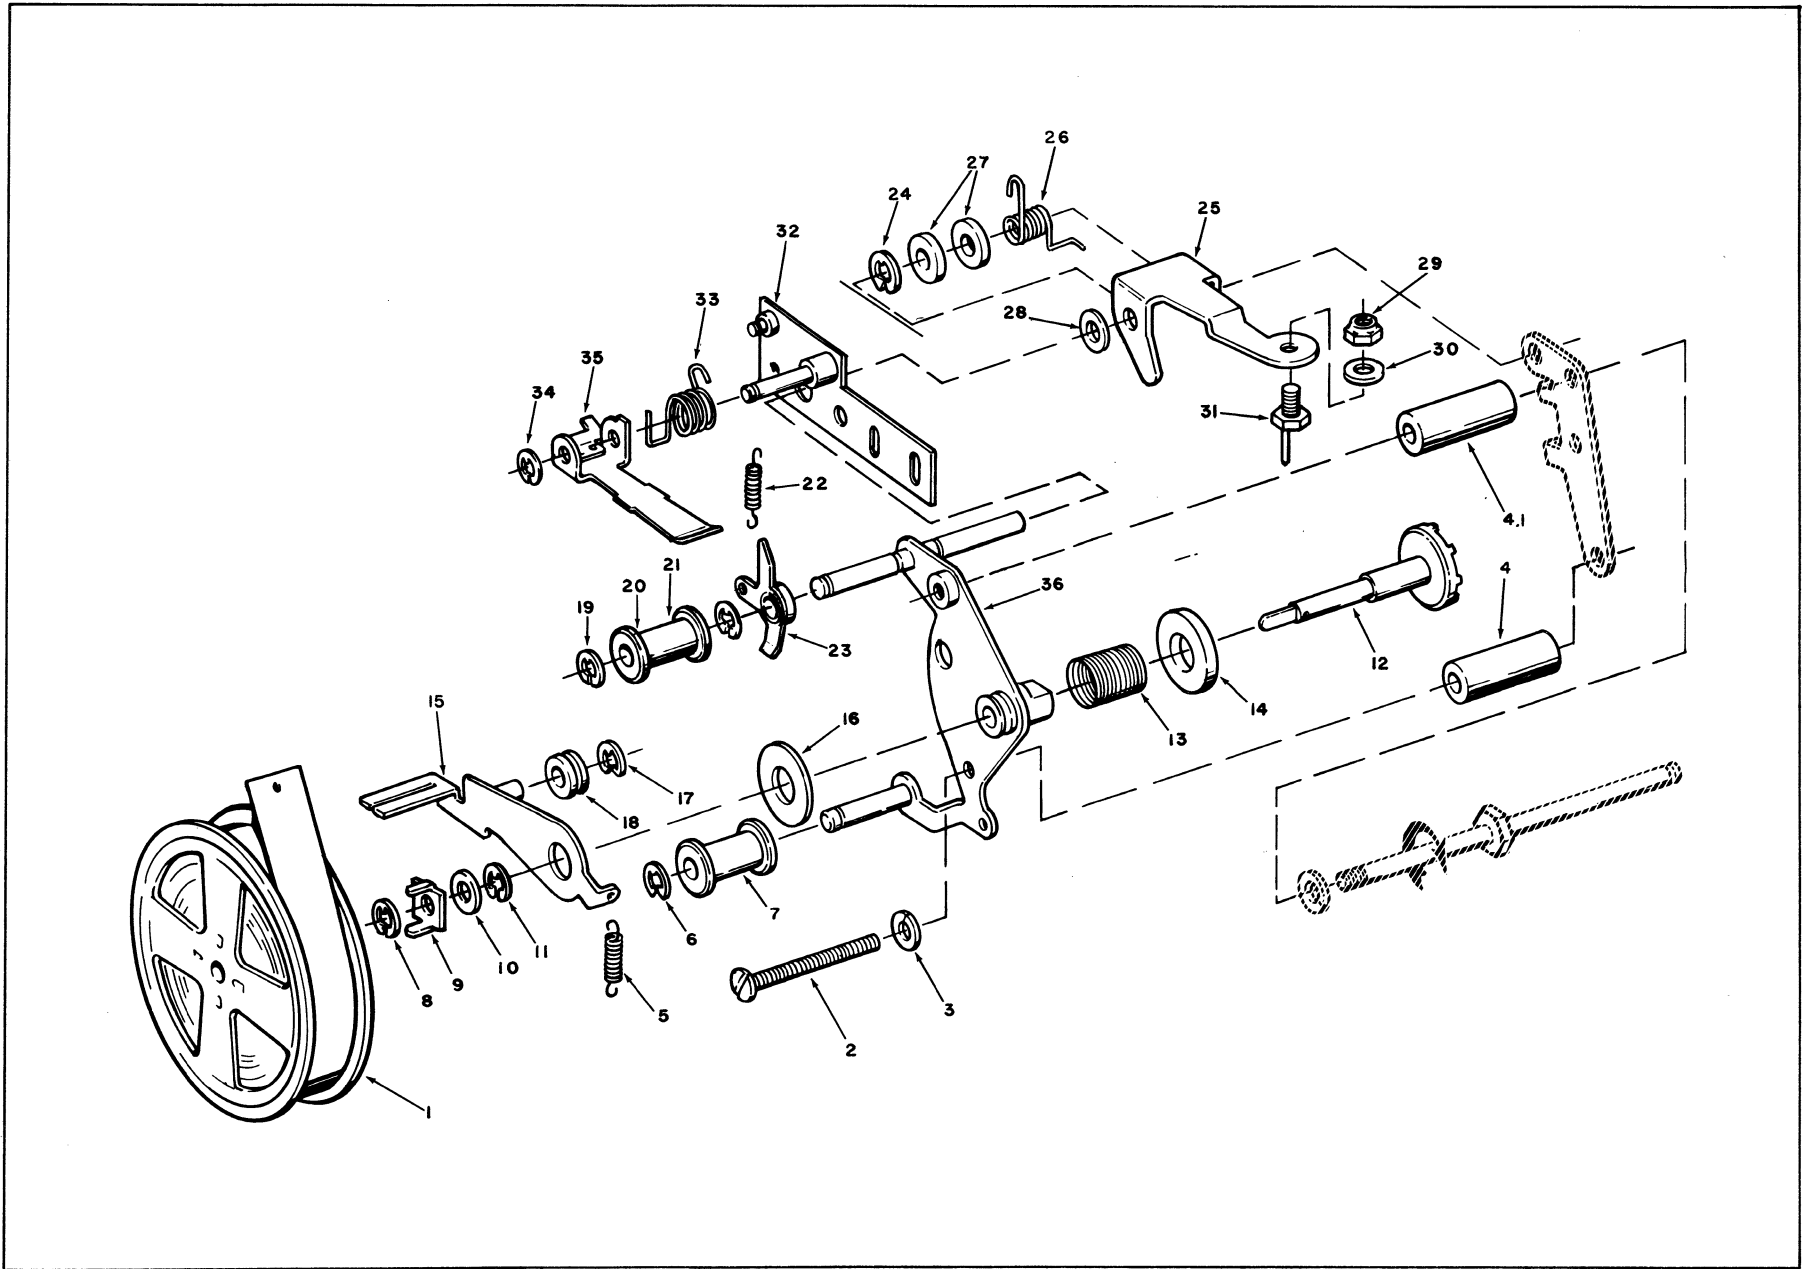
D-8. L.H. ribbon feed assembly, exploded view.
